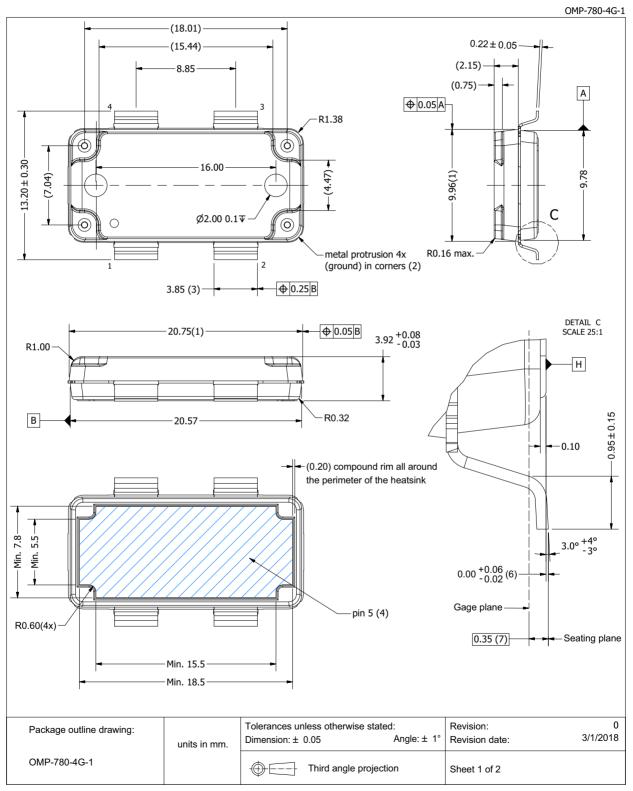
Package outline OMP-780-4G-1 (sheet 1 of 2)
